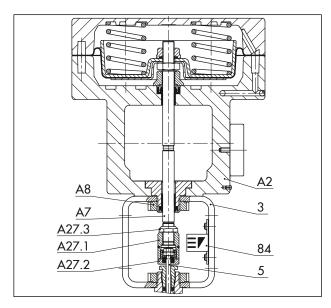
Type 3277 Pneumatic Actuator on a Type 3510 Micro-flow Valve
